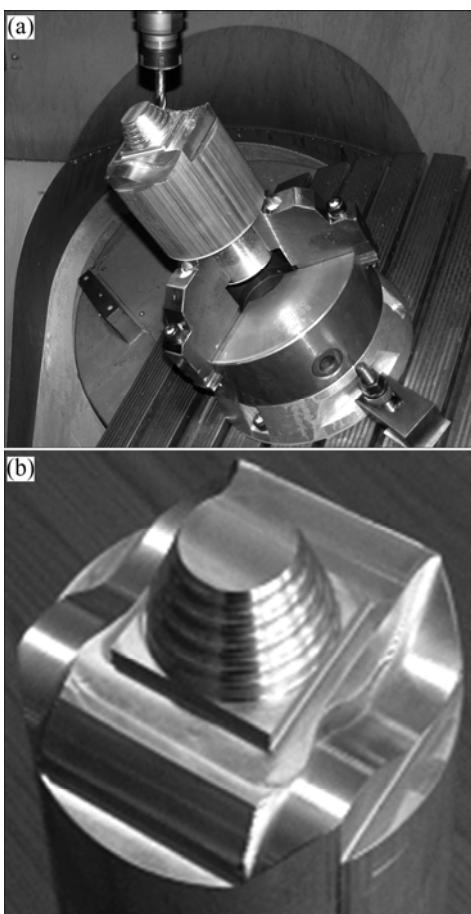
Machining experiment on DMU-70eV 5-axis machine: (a) 5-axis machining; (b) Machined test-piece
